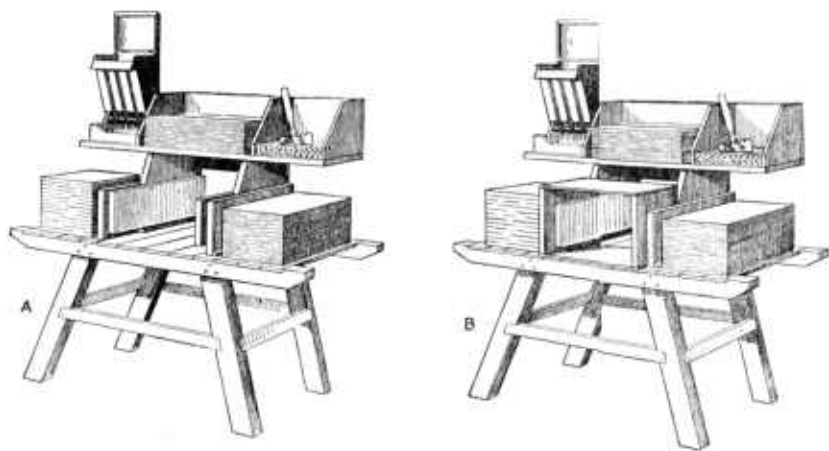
A wooden box-making form and bench showing convenient arrangement of box materials and nail stripper, before ends are placed in position for nailing, and with ends in place and one side nailed.
